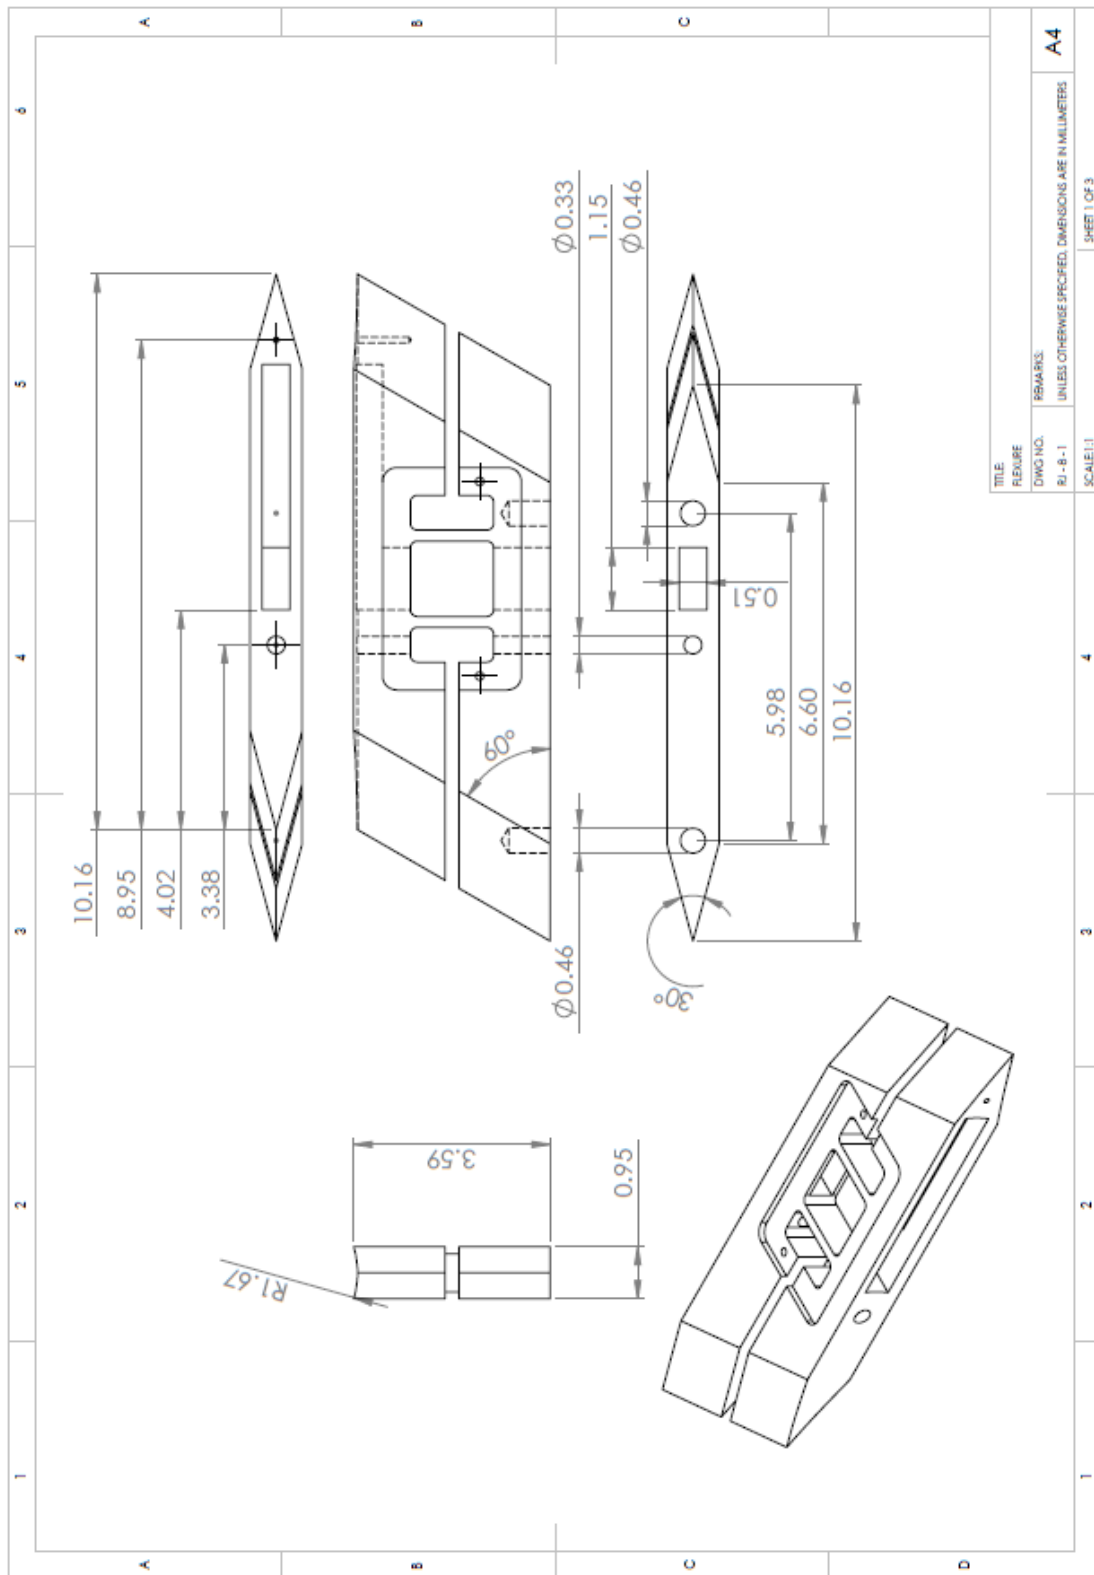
Part drawing: original flexure (RJ - 8 - 1). From [3].
